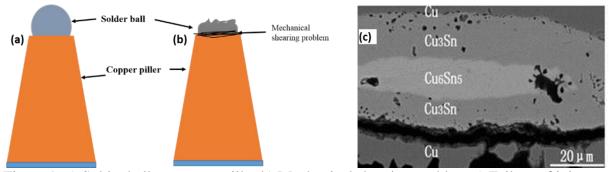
a) Solder ball on copper pillar b) Mechanical shearing problem c) Failure of joint [8].
